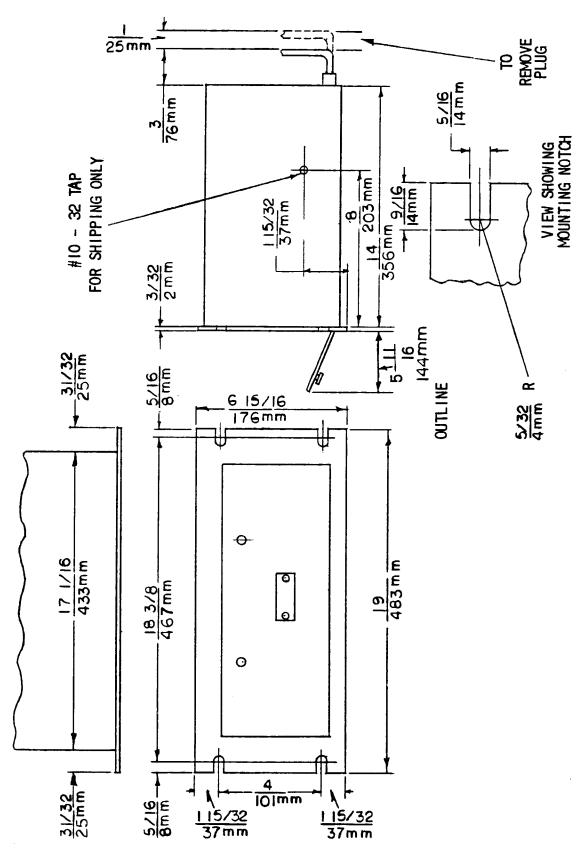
(0227A2037-0) Outline and Mounting Dimensions for Type SLA56 Relays
